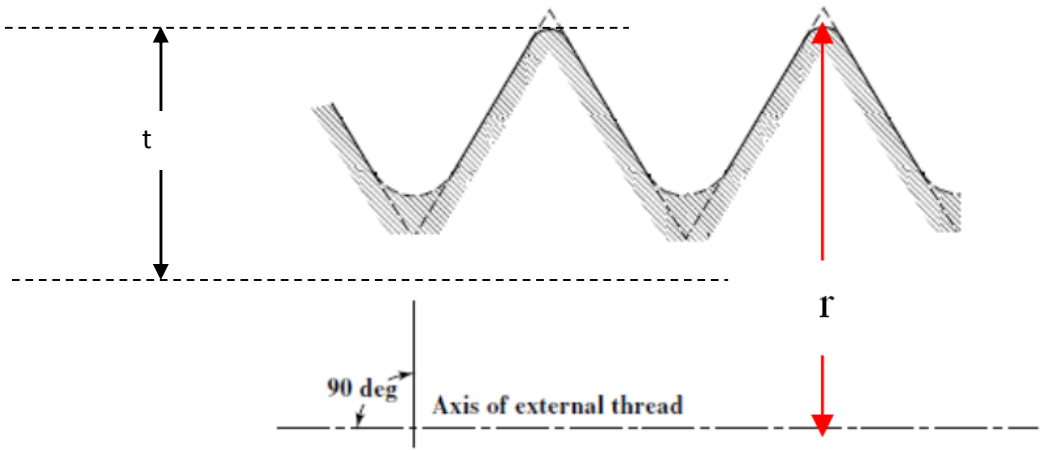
Section A – A from Figure 4.1 Barrel end cross section
